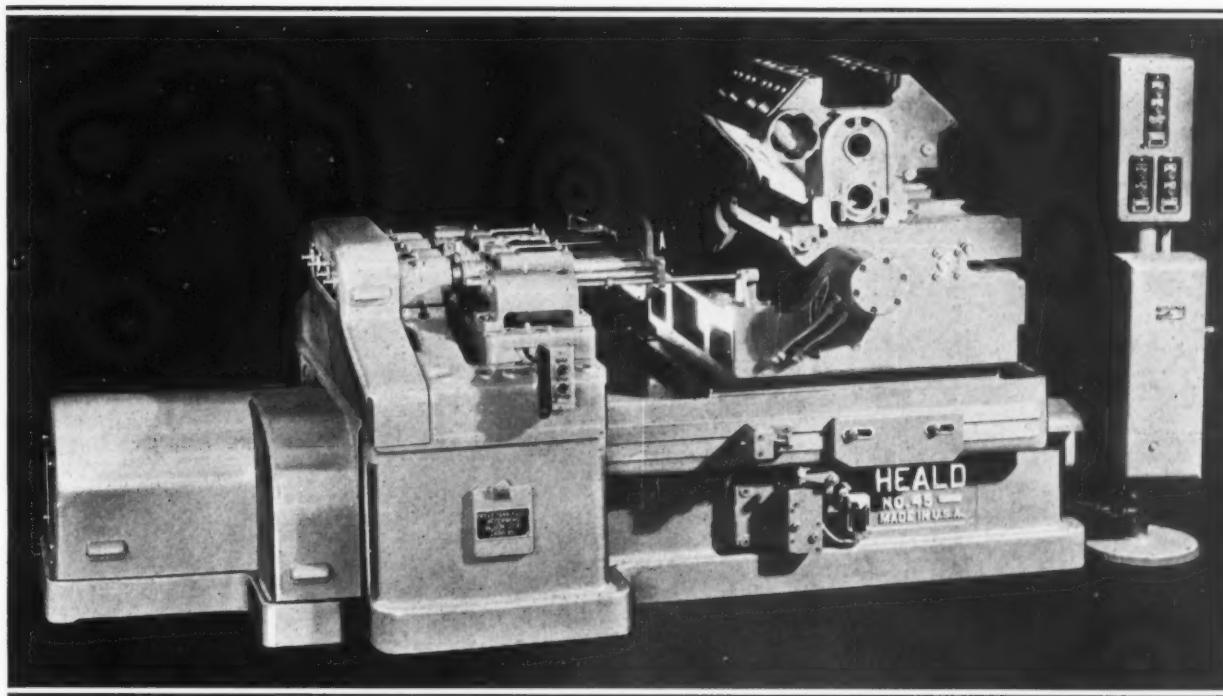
Bore-Matic Equipped for Finish-boring Eight-cylinder Engine Blocks for High-priced Automobiles
